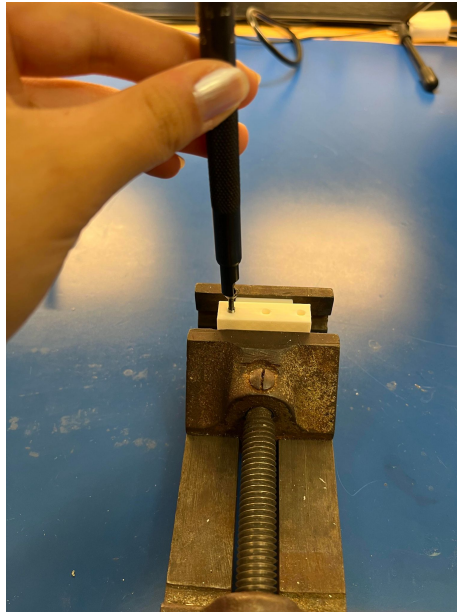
Screw the Helicoil inserts into the tapped hole with the correctly sized installation tool
